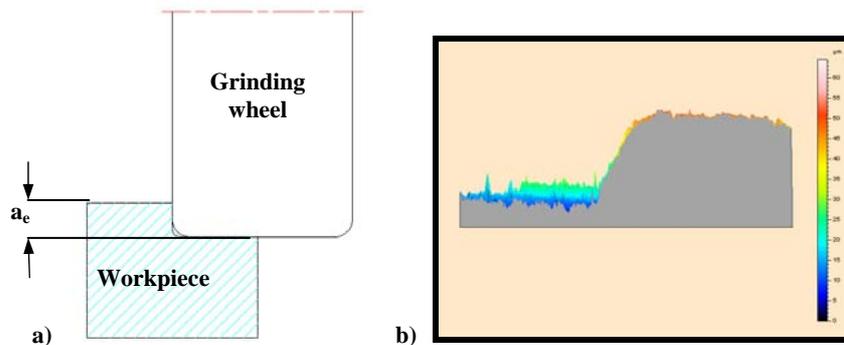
Method of checking actual depth of grinding: a) scheme, b) result
